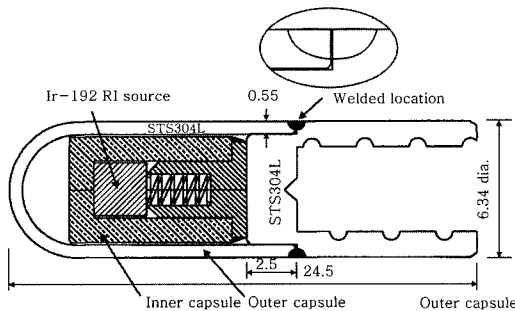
A schematic drawing of a capsule for γ ray nondestructive test showing its dimensions and the welded location
